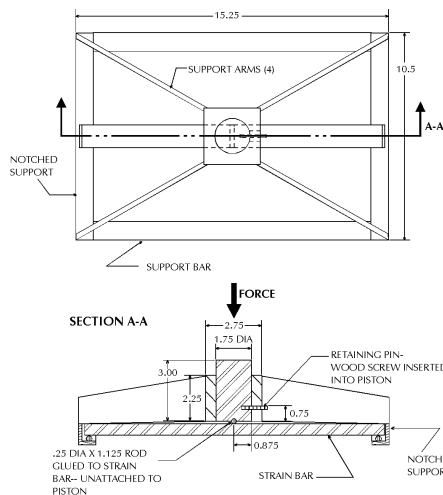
Piston & Cylinder Detail (all dimensions in inches)
